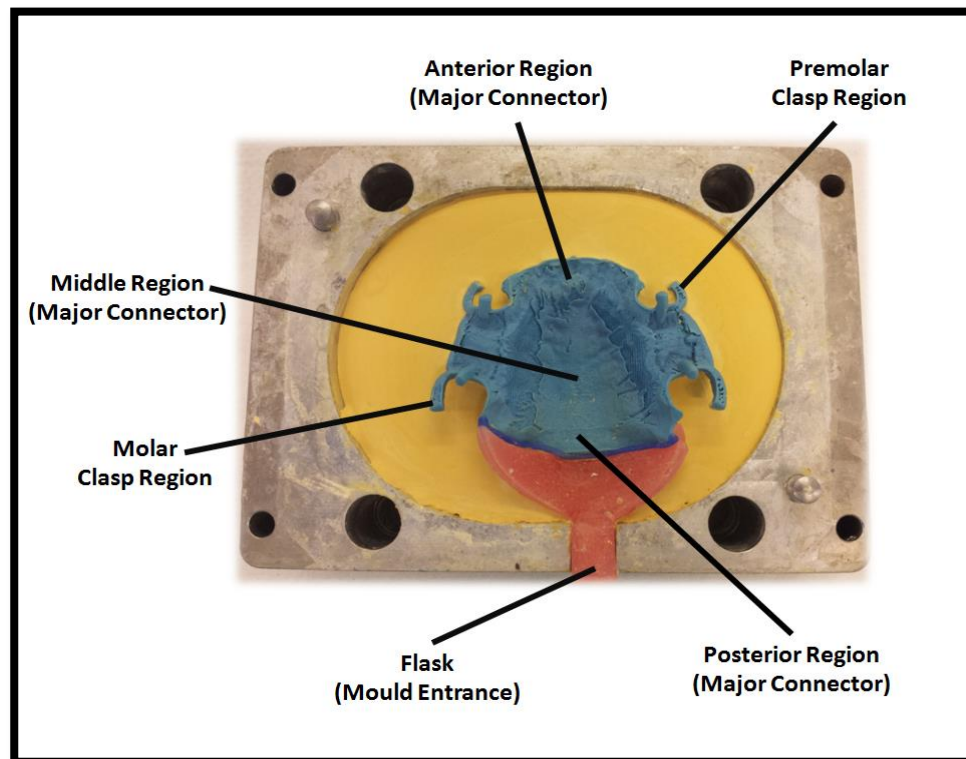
Moulded RPD wax framework showing the location of the different thermocouples inside the mould cavity
